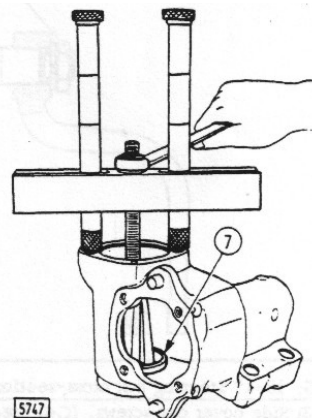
Removing cup of lower tapered roller bearing (7) with puller.
